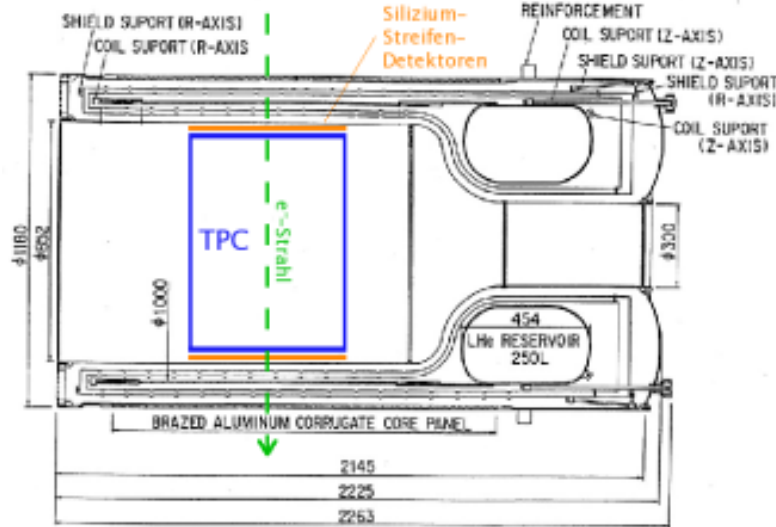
A technical drawing of the superconducting magnet (PCMAG) with the TPC indicated
